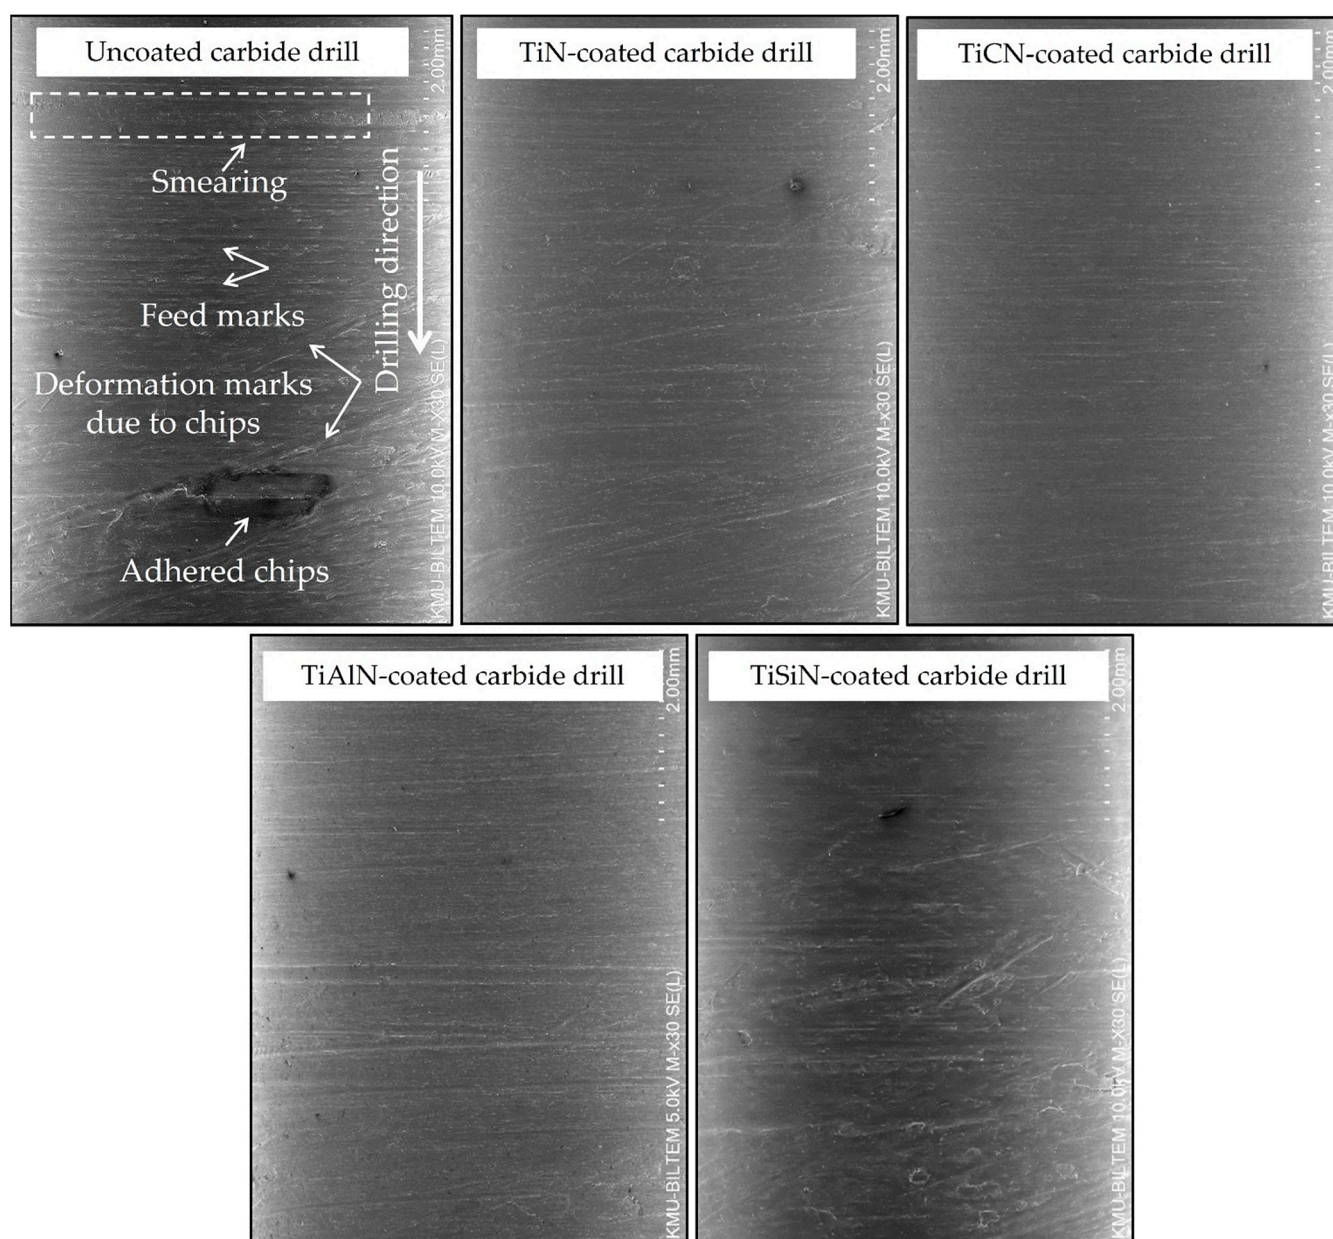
Inner hole surface of Al2024 using uncoated carbide and coated carbide drills at 3025 rpm and 0.14 mm/rev.
